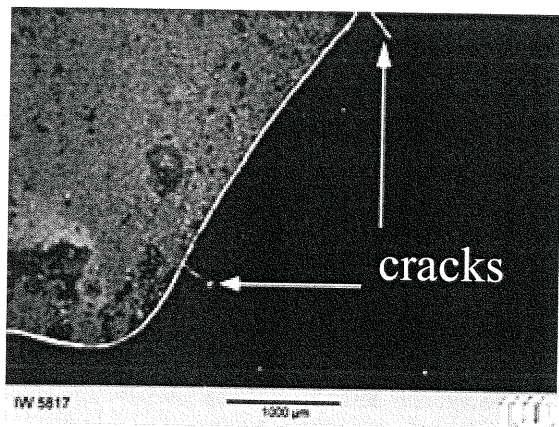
Cracks in a gear tooth following heat-treatment in the spray field.
